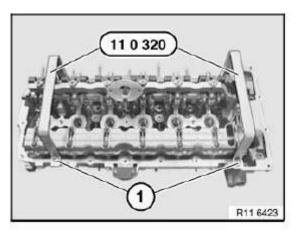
Securing Special Tool With Existing Cylinder Head Cover Bolts Courtesy of BMW OF NORTH AMERICA, INC.
